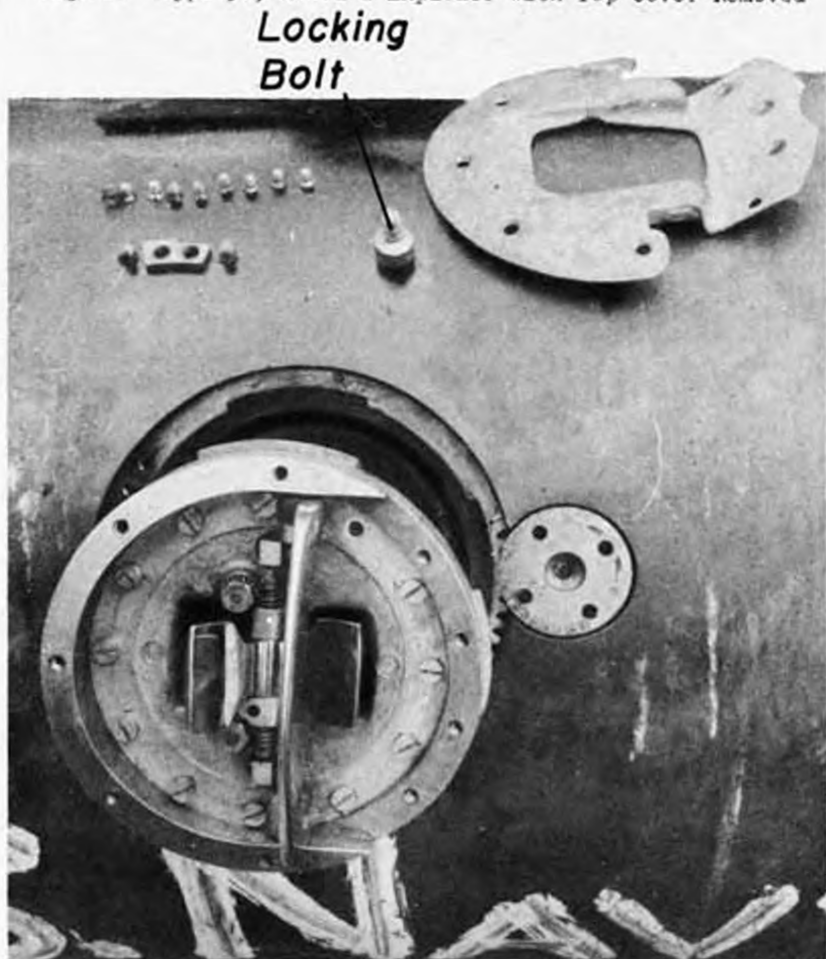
Type 90, Model 2 Exploder Partially Removed from Warhead
